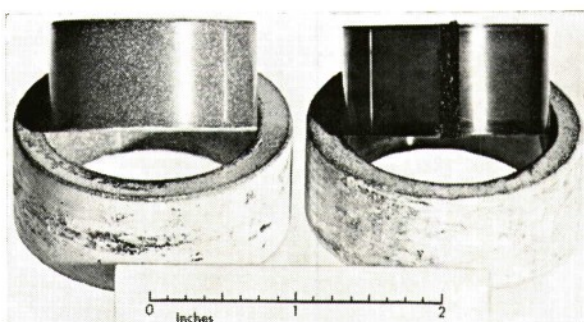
Silicon nitride bearings before and after service showing self glazing habit. The graphite fibre brush shown on the right hand inner ring collects debris and dispenses a lubricating smear of graphite over the surfaces.
